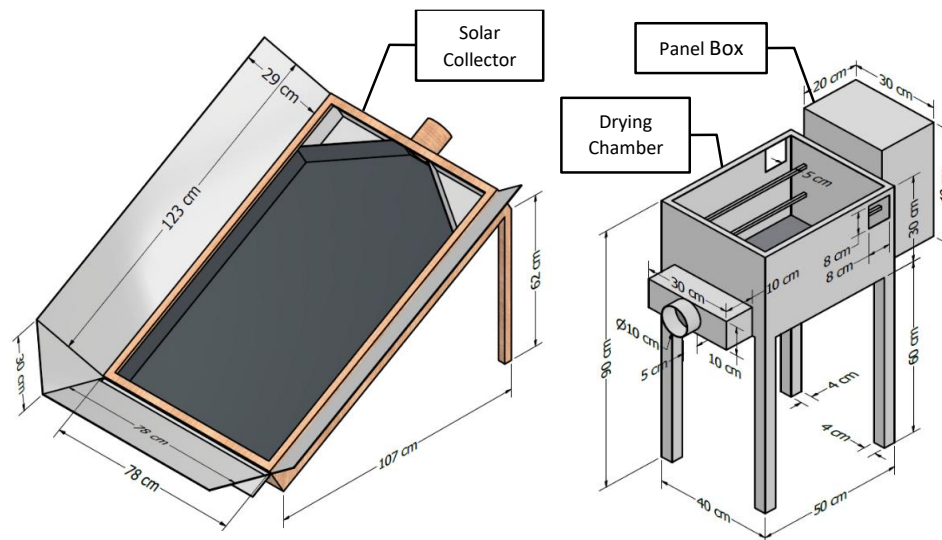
Mechanical design and dimensions of solar collector, drying chamber, and panel box
